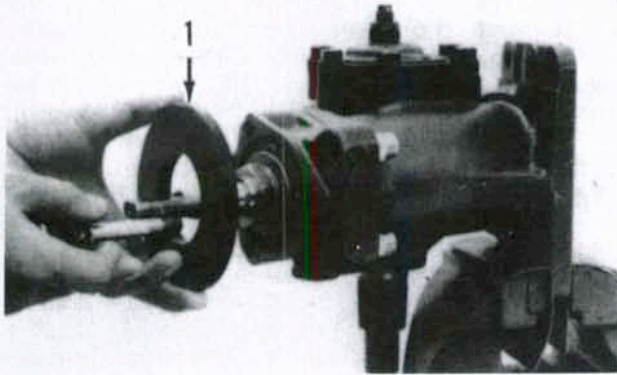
Install special mounting plate (1) to retain ball nut and thrust bearings while tightening worm shaft locknut. See Fig. 36A.
